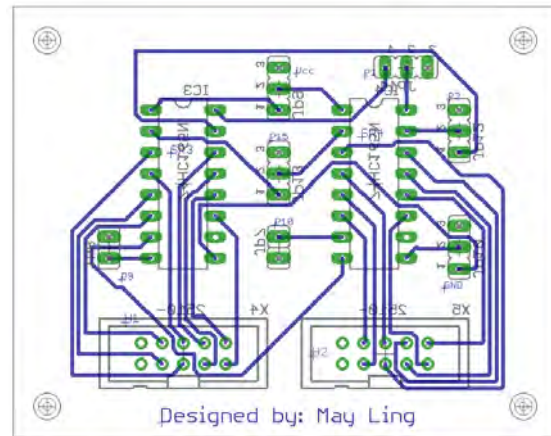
PCB Layout of 3rd and 4th Shift Registers – SR3 & SR4
